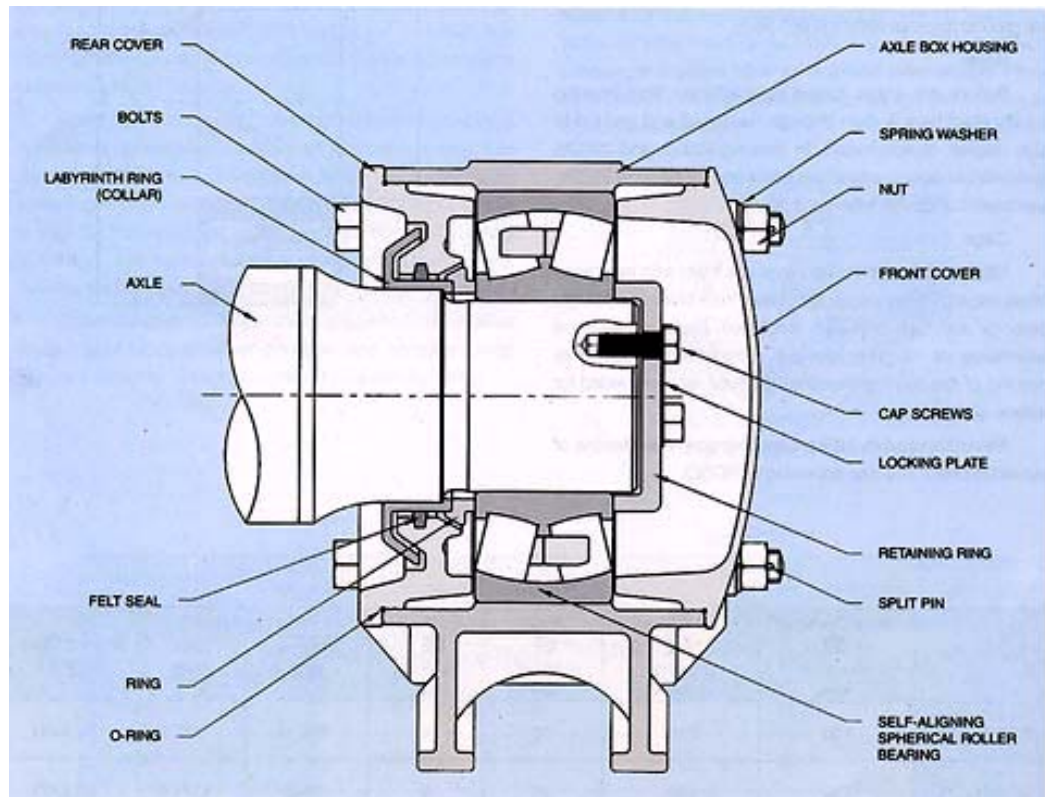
Spherical Roller Bearing and Axle Box Assembly
